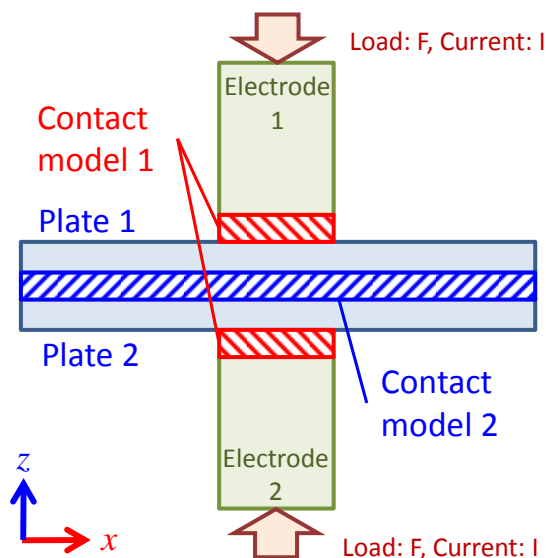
Contact model for spot welding analysis.
